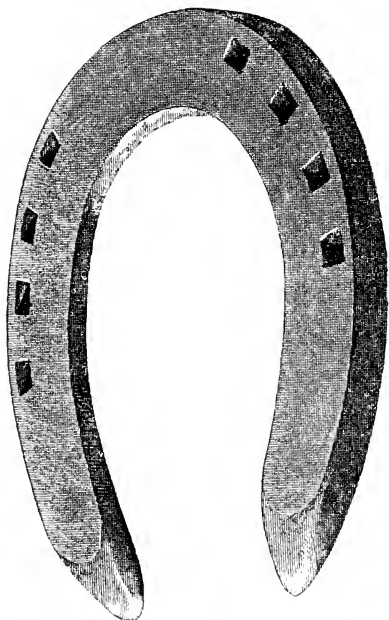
Stamped fore shoe (for railway shunting horses).
